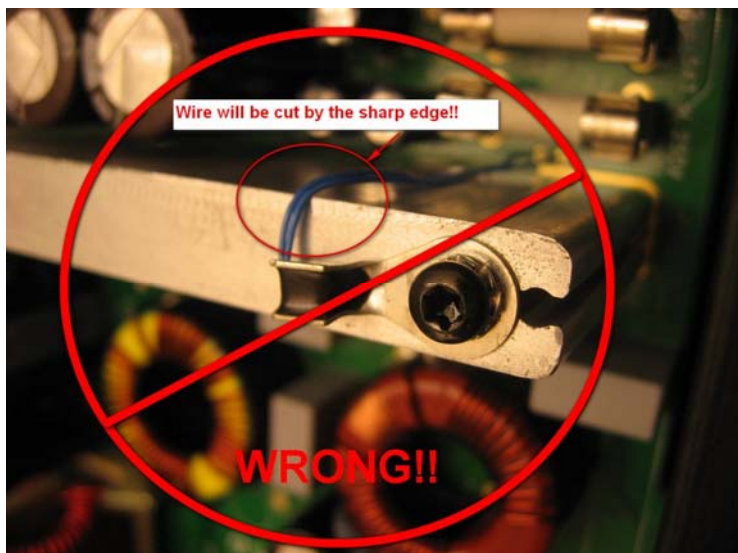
Be sure to mount the sensor correctly!! This is WRONG.
